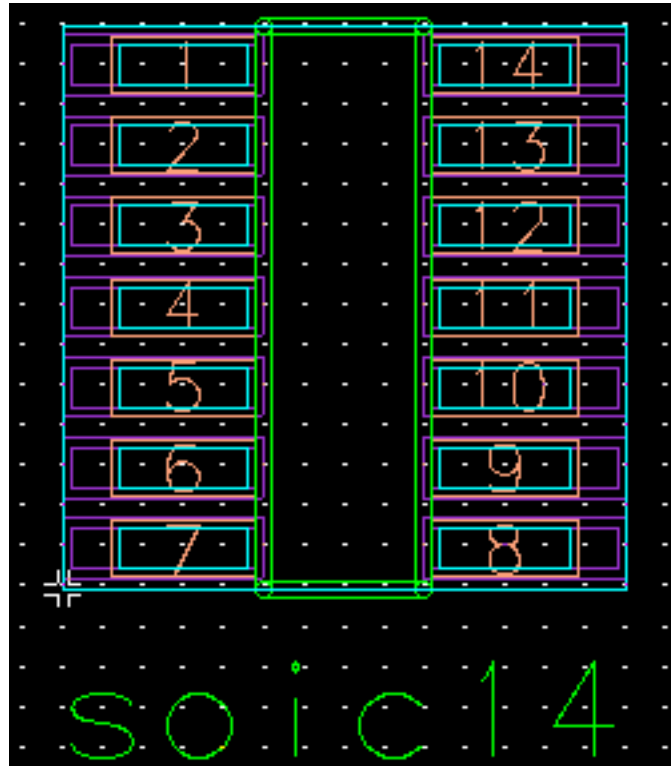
The Placement Outline and Reference Designator on SOIC14
